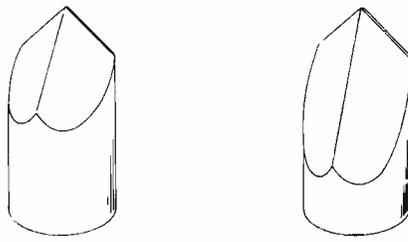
Lacquer cutting styli shapes: (left) 35° back-angle; (right) 45° back-angle.
